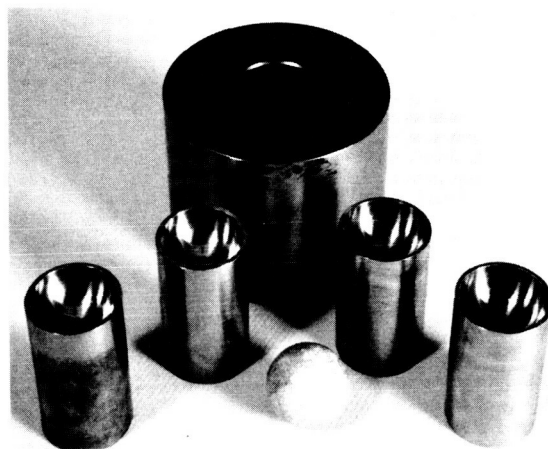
Forming and Encapsulation Tools for Fabrication of Ball Valve Seals Shown with End Item
